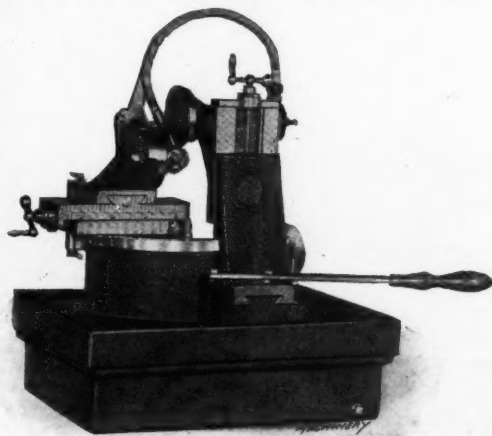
Waltham Cutter Grinder arranged for "gumming" Face of Teeth
